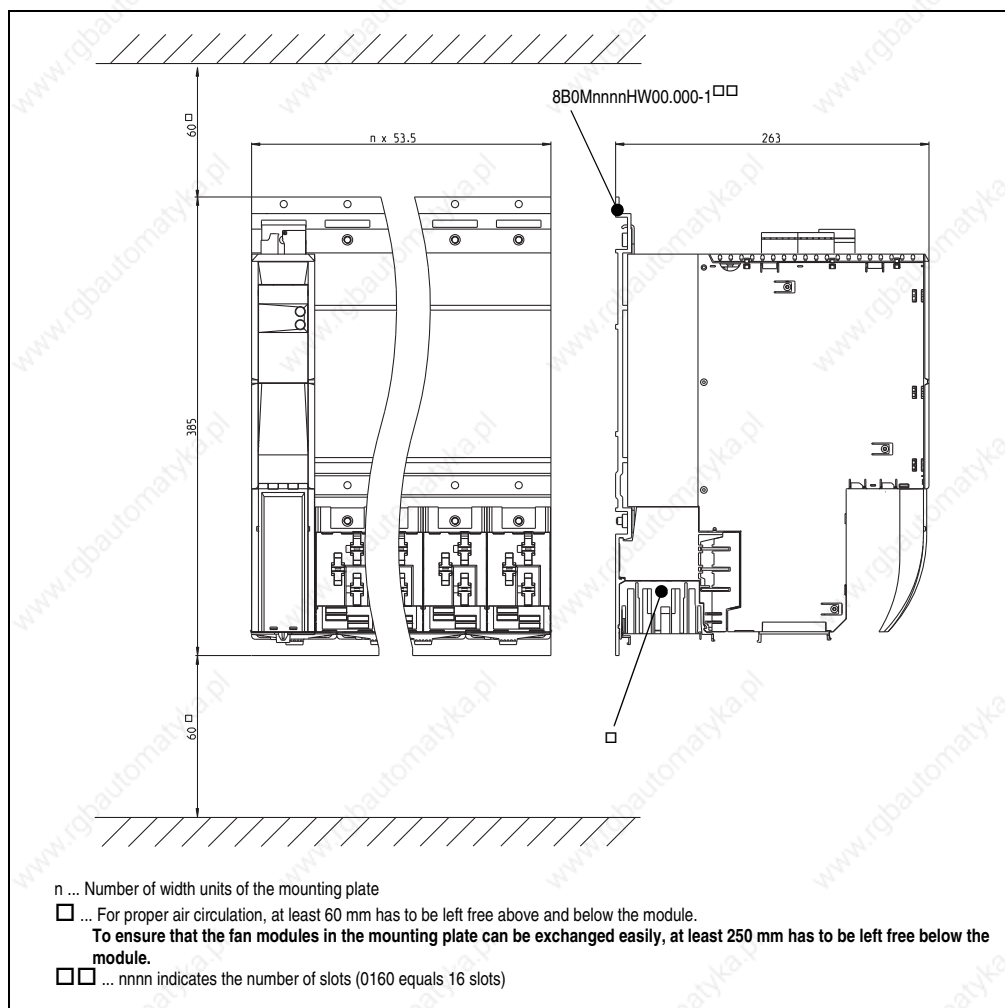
Dimensional diagram and installation dimensions for 8B0C0160HW00.001-1, 8B0C0320HW00.002-1
